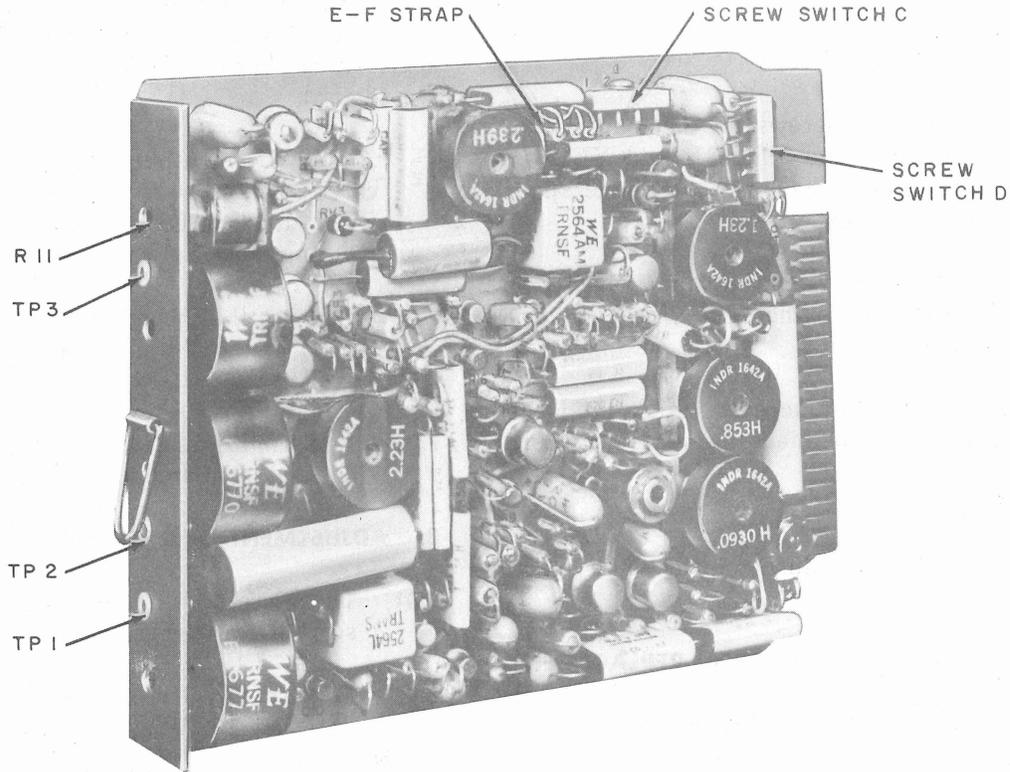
Data Set 108A-Type—Location of Test Points and Screw Switches
